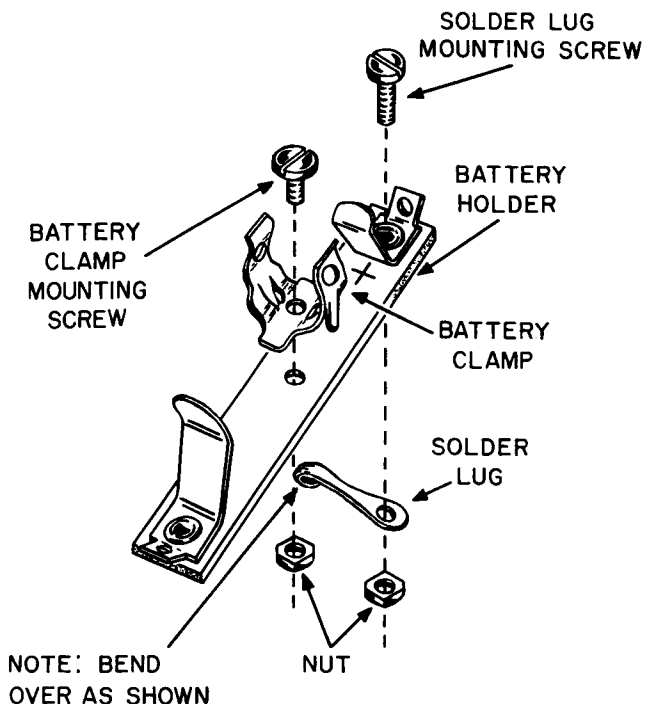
HOW TO ASSEMBLE THE BATTERY HOLDER
